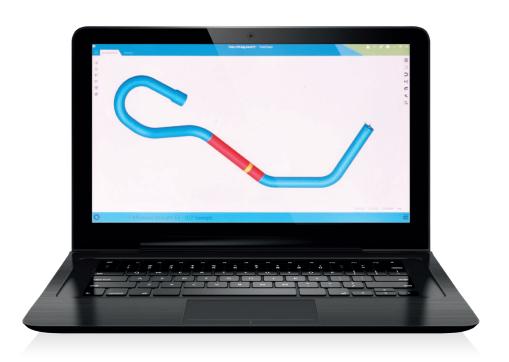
years' experience in the tube-measurement sector. the Hexagon Tube Inspection System is the leading totally integrated solution for the measurement of tubes, pipes and bent wire.
